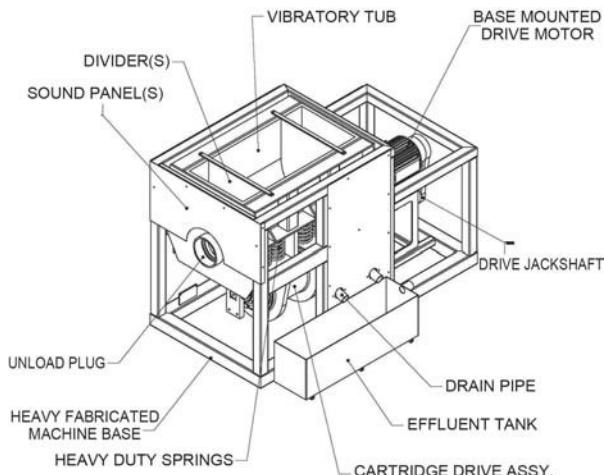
Portable vibratory machine (courtesy: Roto-Finish)
